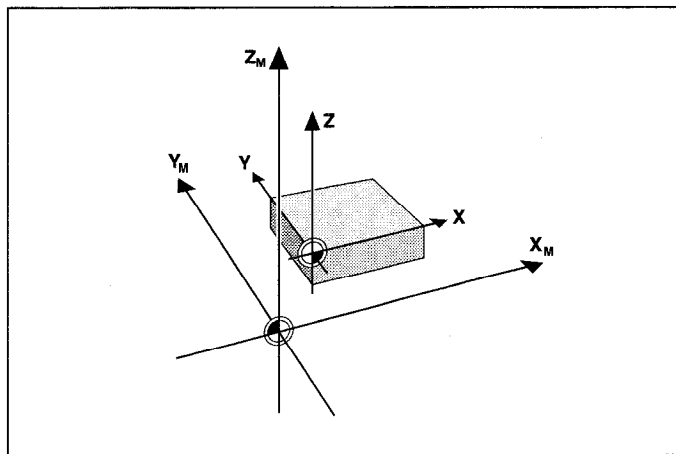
Machine-⊙ and workpiece datum ⊗
